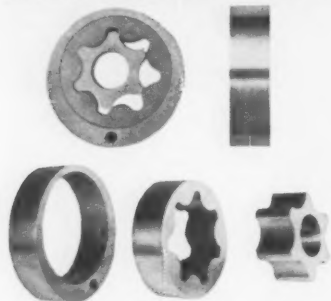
Three Gerotor components permit pump to be incorporated as integral part of housing or frame of mechanism, eliminate need for purchase and mounting of separate, complete pump.
